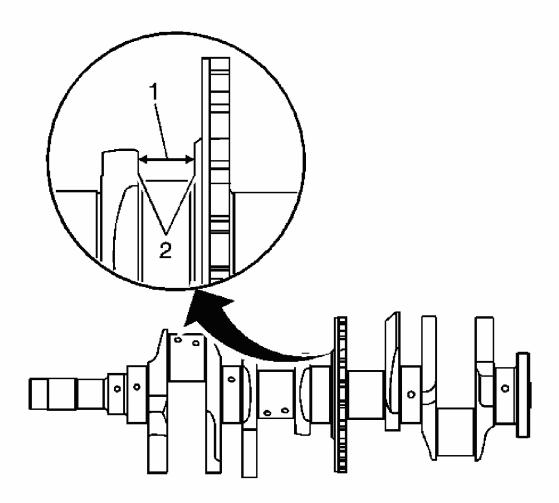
Expanded View of Crankshaft Thrust Wall Width Courtesy of GENERAL MOTORS CORP.
